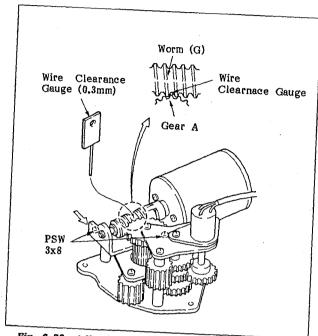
Adjusting the Position of the Threading Motor Assembly
